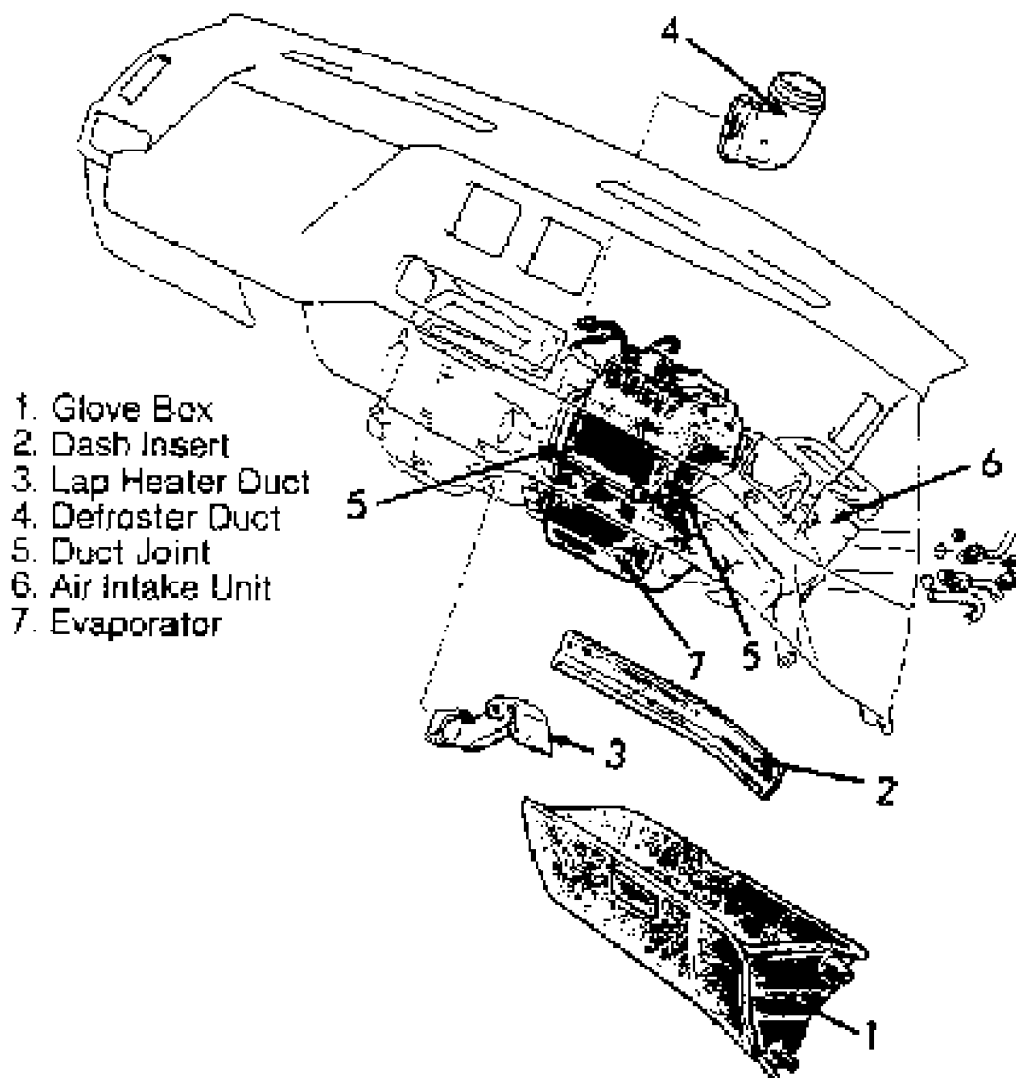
Removing Evaporator Assembly (Colt Vista)
